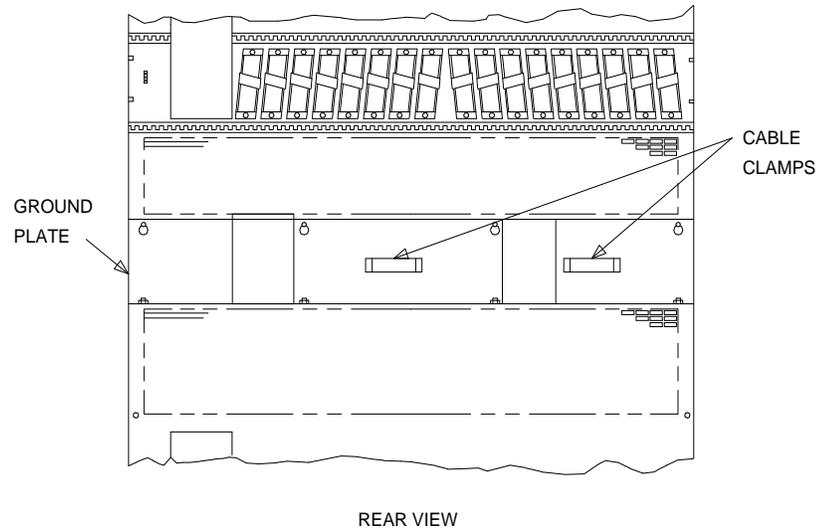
Locations of Ground Plate and Cable Clamps on Single-Carrier Cabinet
